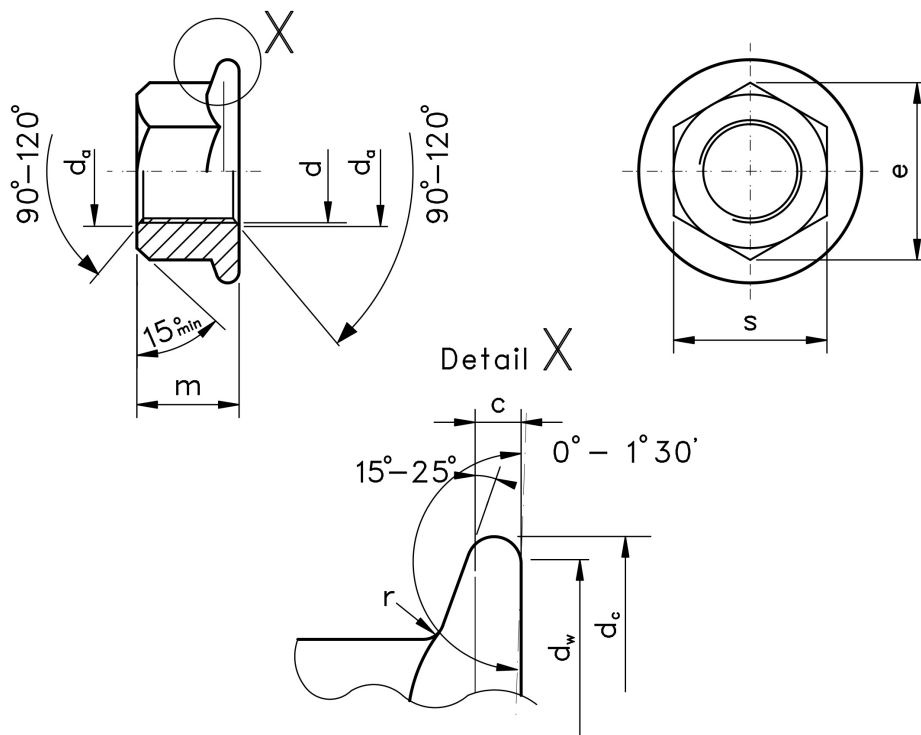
Plain Hex Flange Nut with Fine Pitch Thread
